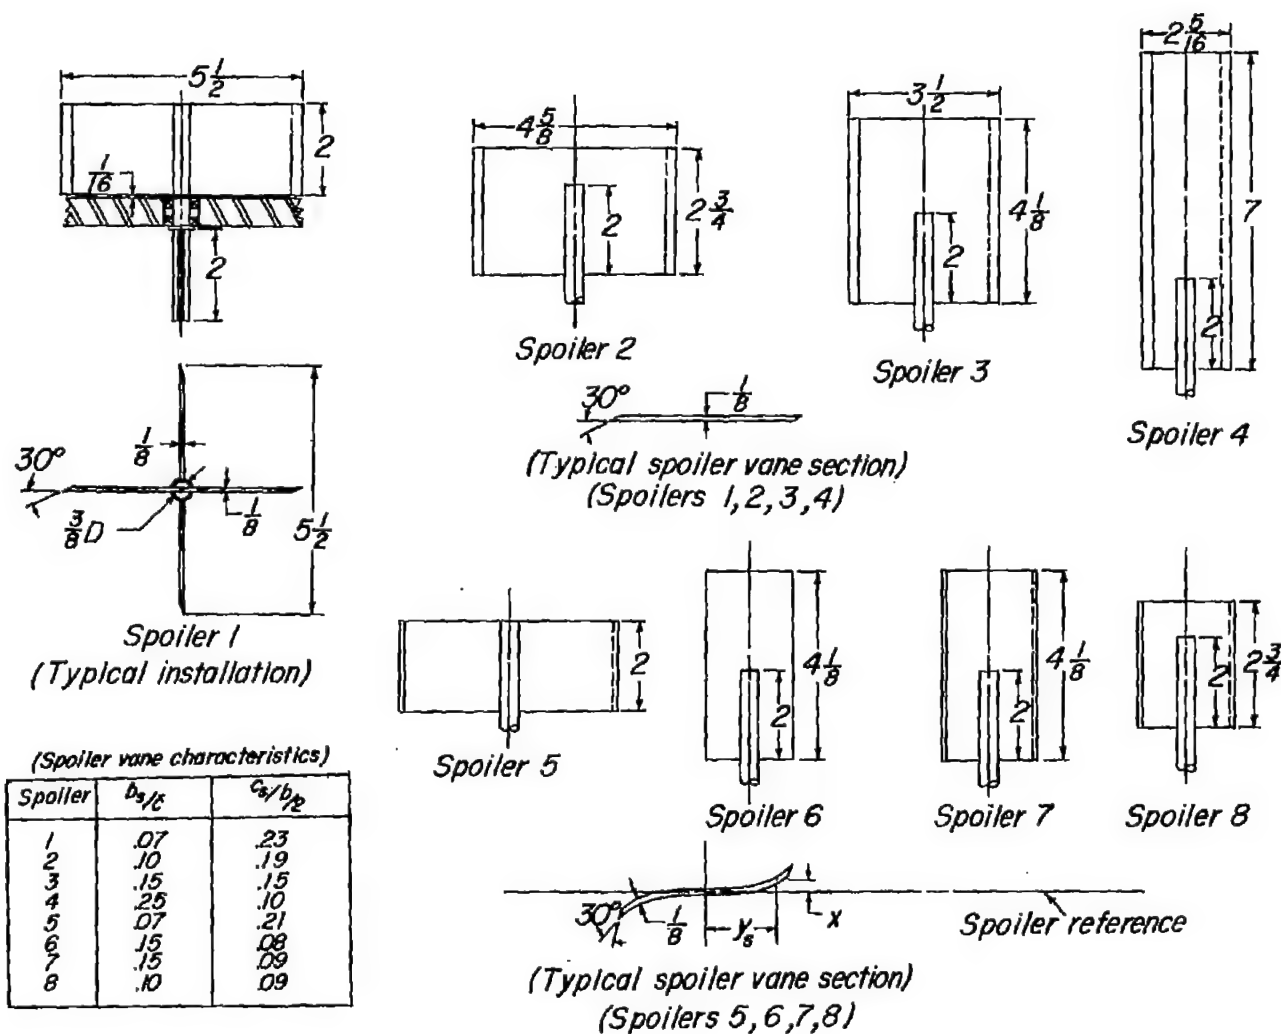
Details of plain and cambered spoilers tested on 60° thin delta wing. (Coordinates of cambered spoilers are presented in table I. All dimensions in inches unless otherwise specified.)
